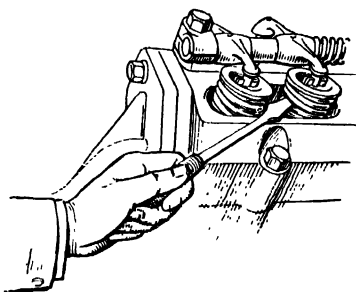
Testing for a Weak Exhaust Valve Spring.
